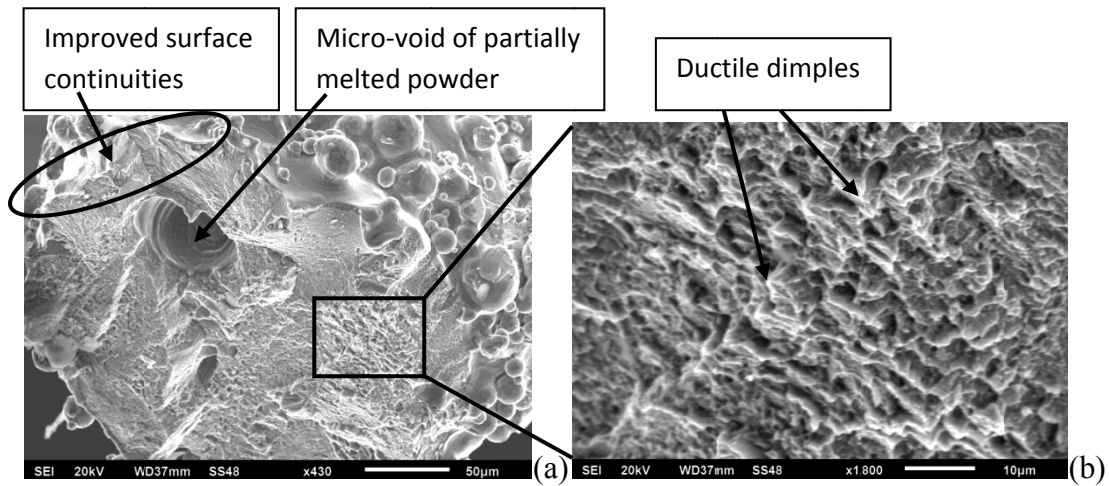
Fracture surface of the heat-treated micro-strut due to tensile loading (35° build angle, 200 W laser power and 1000 µs laser exposure time); (a) at lower magnification; (b) at higher magnification which shows ductile dimples [S1-35-200-1000-HT(B)]
